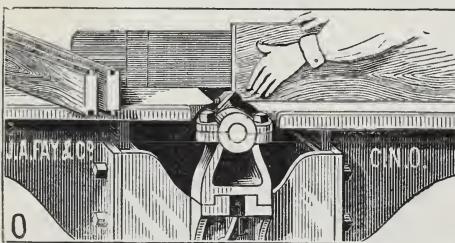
FIG. O.—MACHINE ARRANGED FOR HAND MATCHING.
